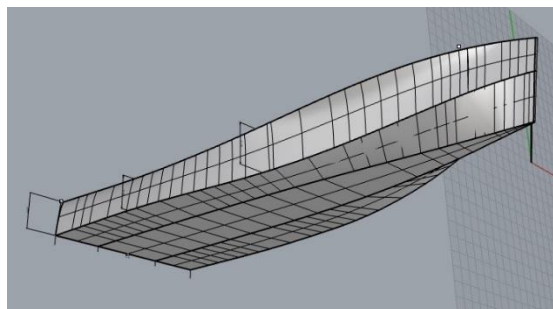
Upper hull structure and horizontal panel scaled to prototype dimensions.
